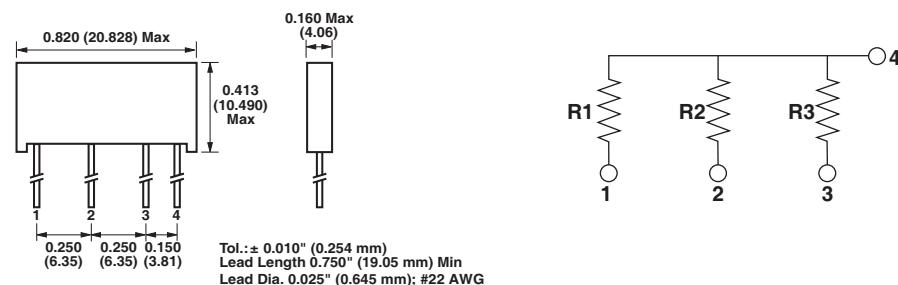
MOLDED 2R, 3R, 4R RESISTOR NETWORK DIMENSIONS AND CIRCUIT DESIGN in inches (millimeters)
